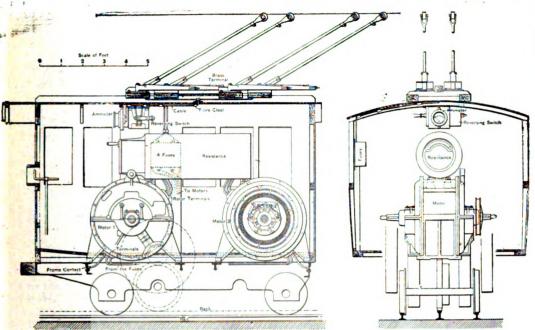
VIEW OF LOCOMOTIVE, SHOWING ELECTRICAL EQUIPMENT.
